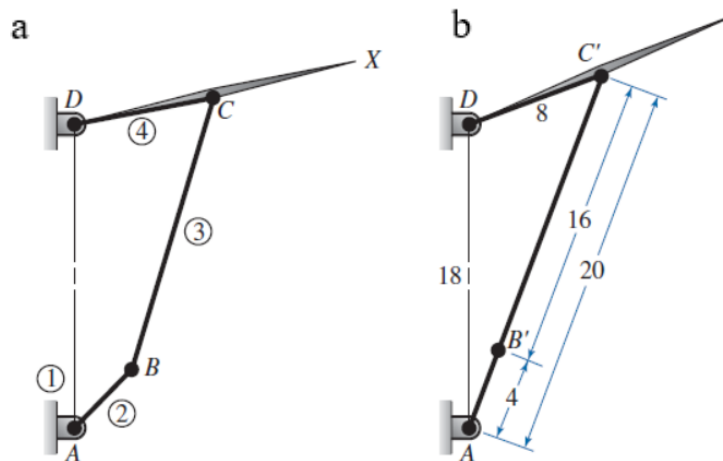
(a) Starting Position Conveyor Segment Movement Mechanism. (b) Maximum Position Conveyor Segment Movement Mechanism
